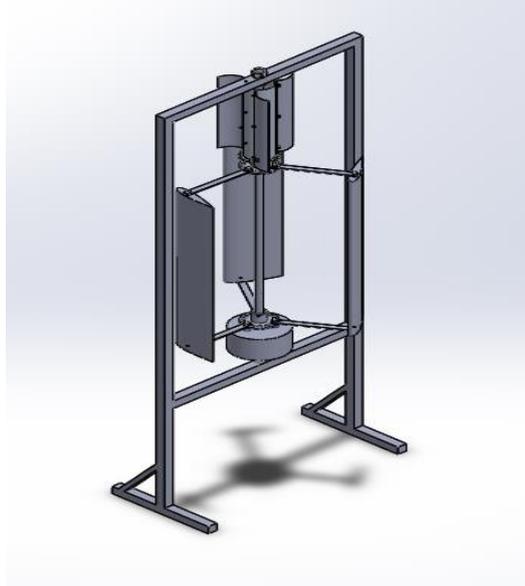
Three-Dimensional Drawing of Mix Wind Turbine
